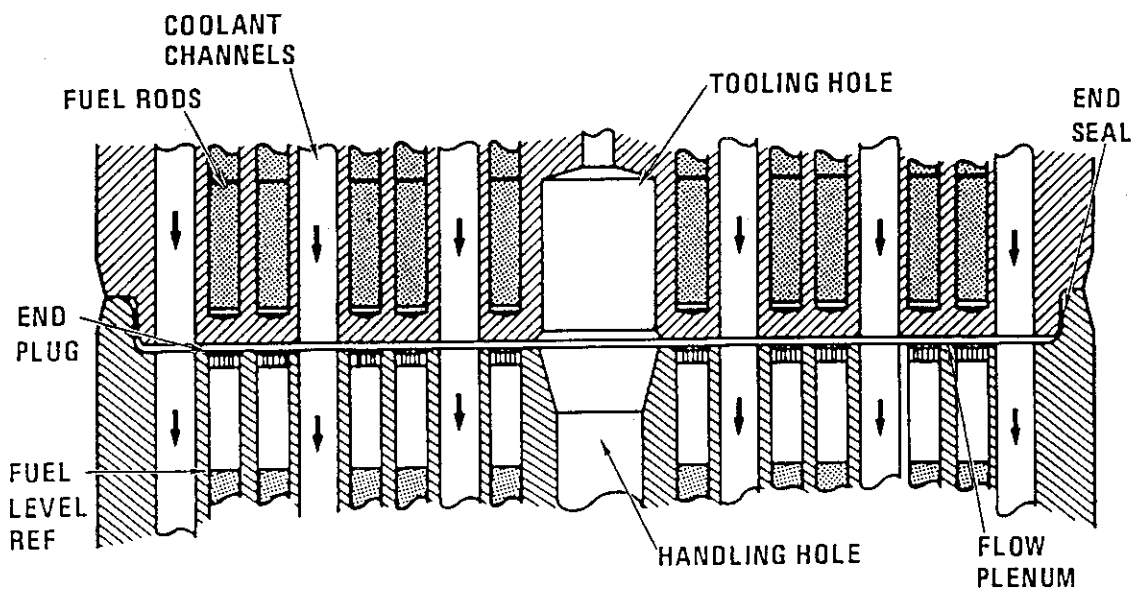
2240 MWt HTGR-SC/C Fuel Element End Seal (Elevation View)
